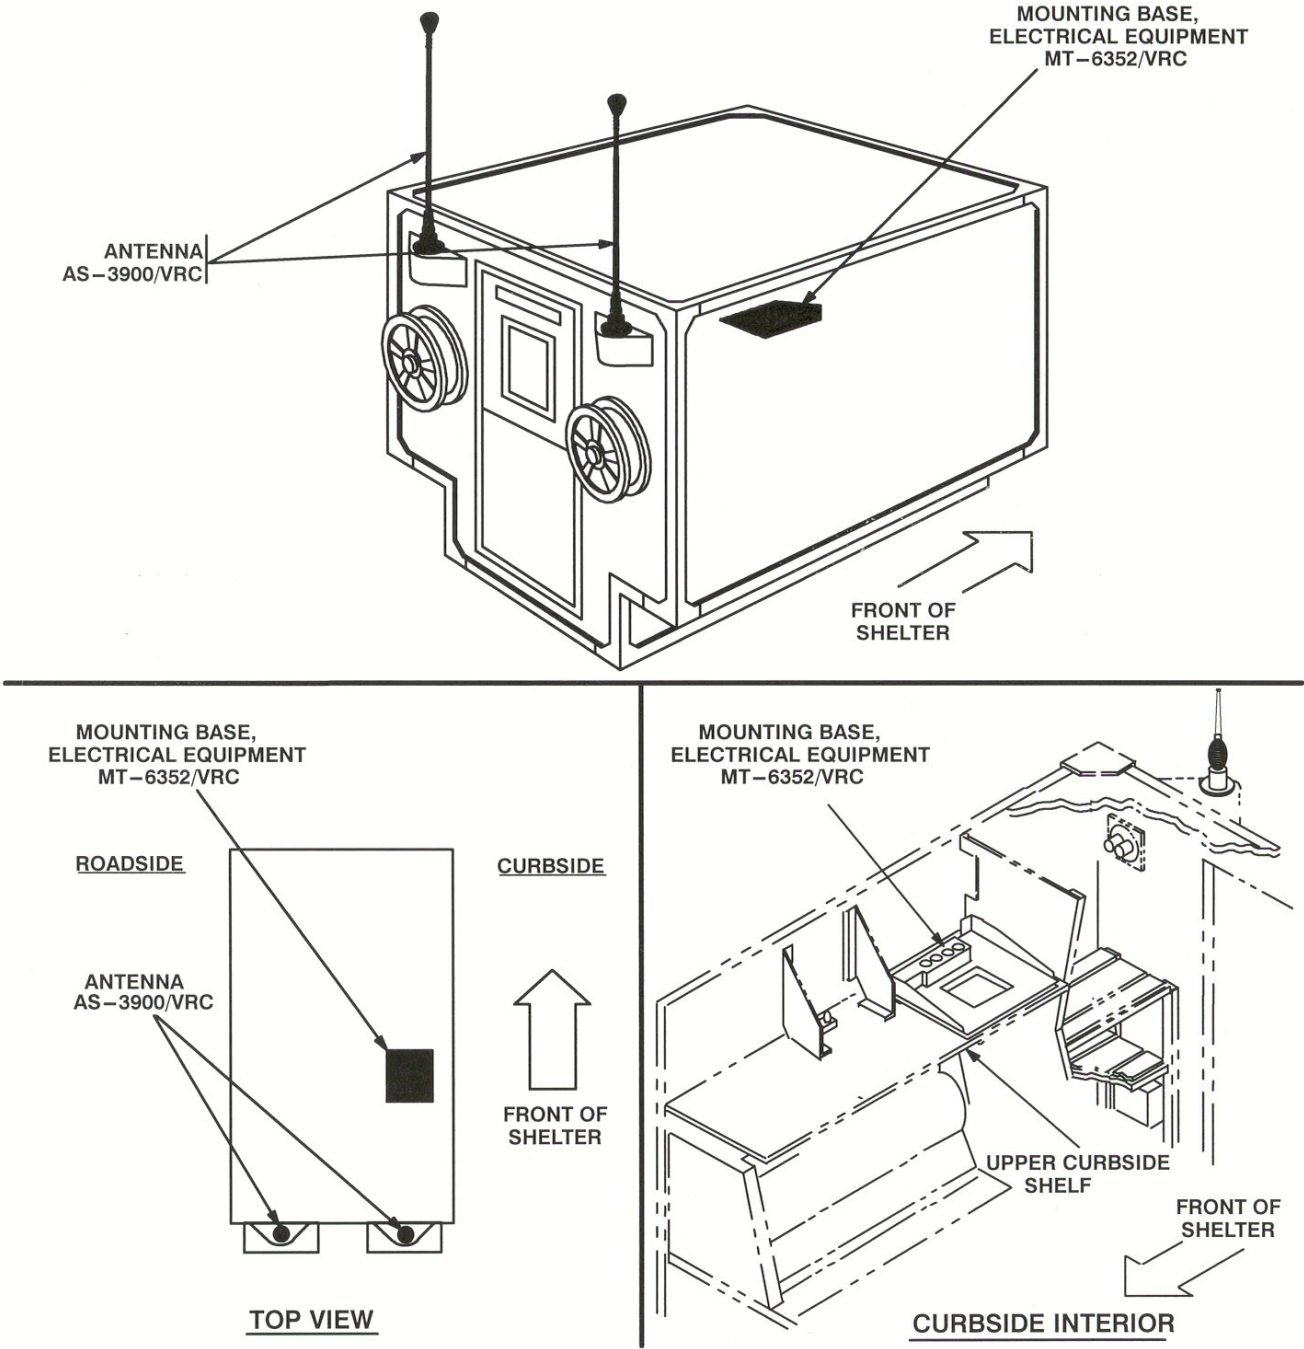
(1). MK and Radio Installation: MK Equipment Locations
